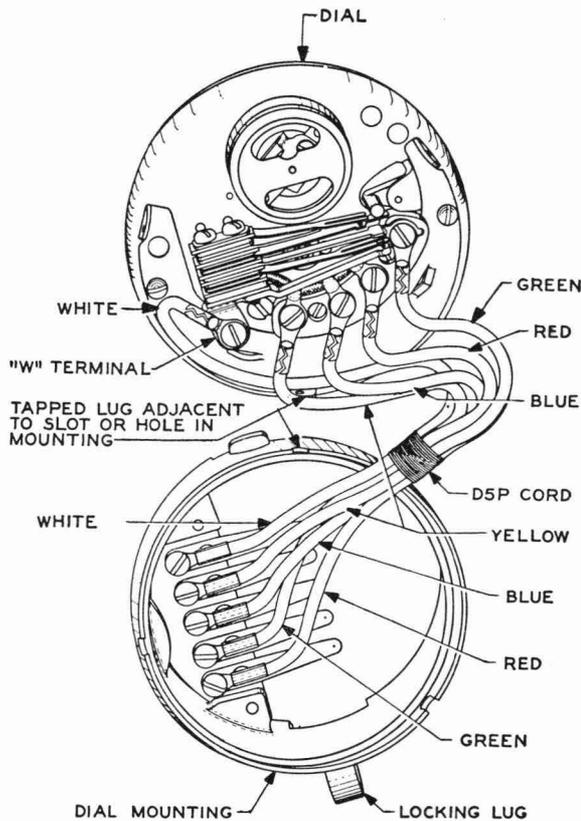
Method of Cording Dial Mountings and Dials Having Their W Terminal as Part of the Contact Spring Assembly, Using D5P Cords
